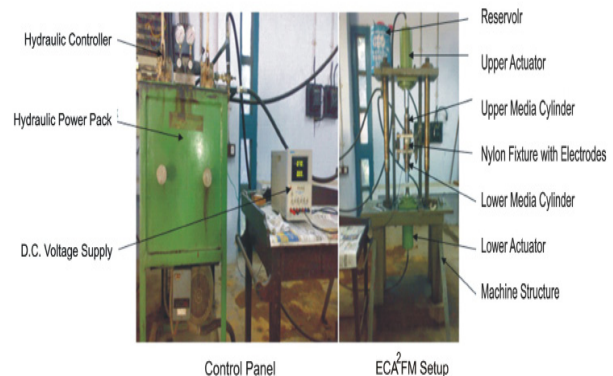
Photographs of ECA²FM Control Panel and Setup
